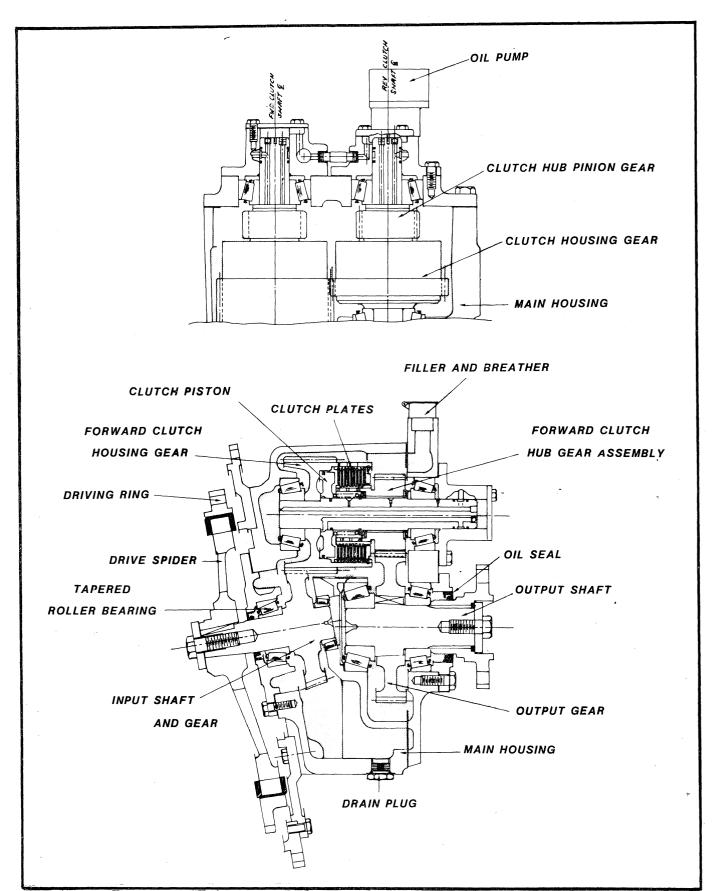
MG-506-A Marine Transmission — Cross Section Drawing.
